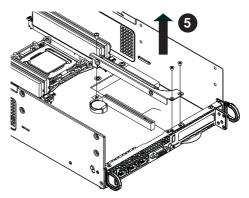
Removing the Screw Securing the PCIE Slot Cover
